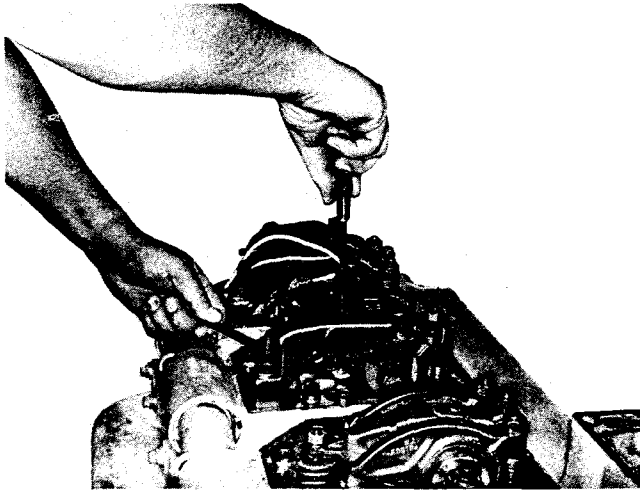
, (K114105). Adjusting crosshead to slave piston clearance
